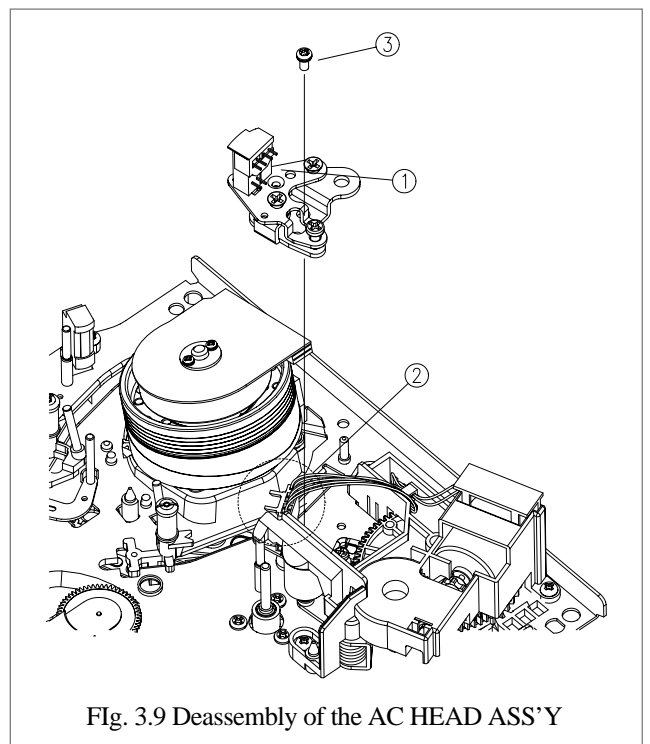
Deassembly of the AC HEAD ASS'Y
